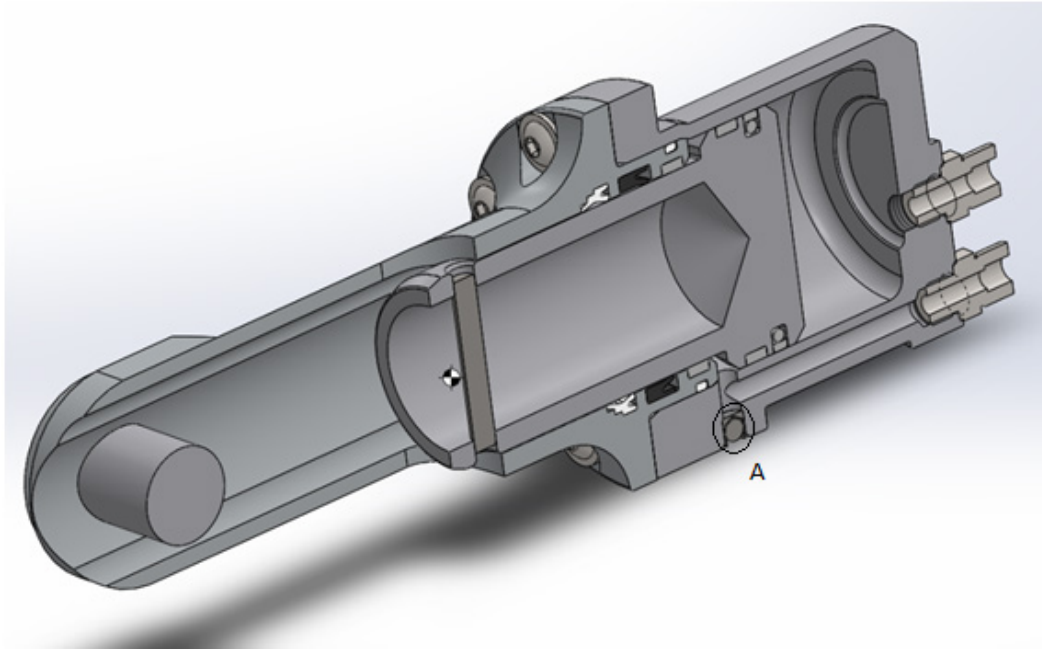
A cross-section view of the finished cylinder assembly. Detail A highlights the placement of the hydraulic plug. Placement of the hydraulic seals and guide strips is also shown.
